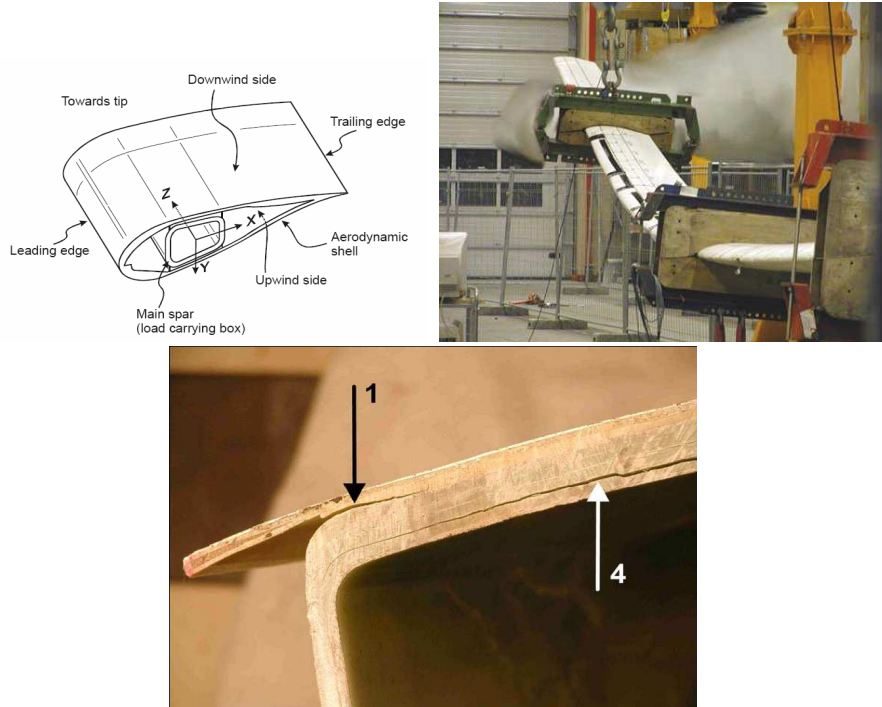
(a) Cross section of wind turbine blade, (b) test to failure and (c) cross section of load carrying main spar after failure showing delaminations close to the corners.
